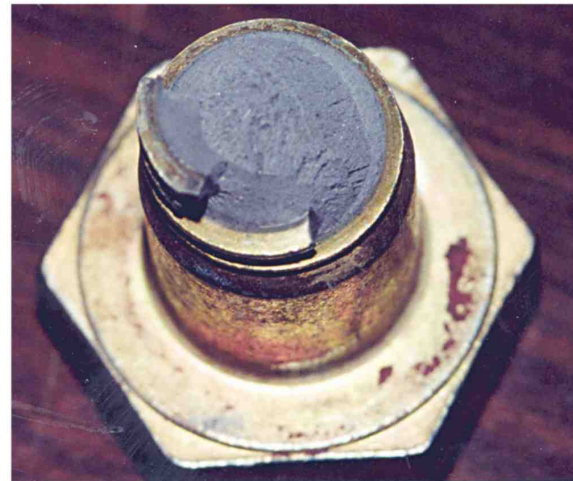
Fracture surface of the fastener that failed at upper flange.
